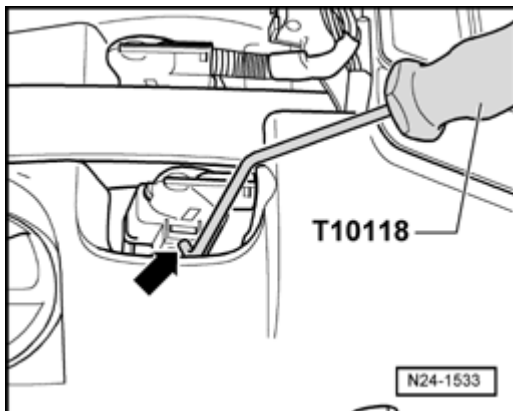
Identifying Assembly Tool T10118 On Release Button
